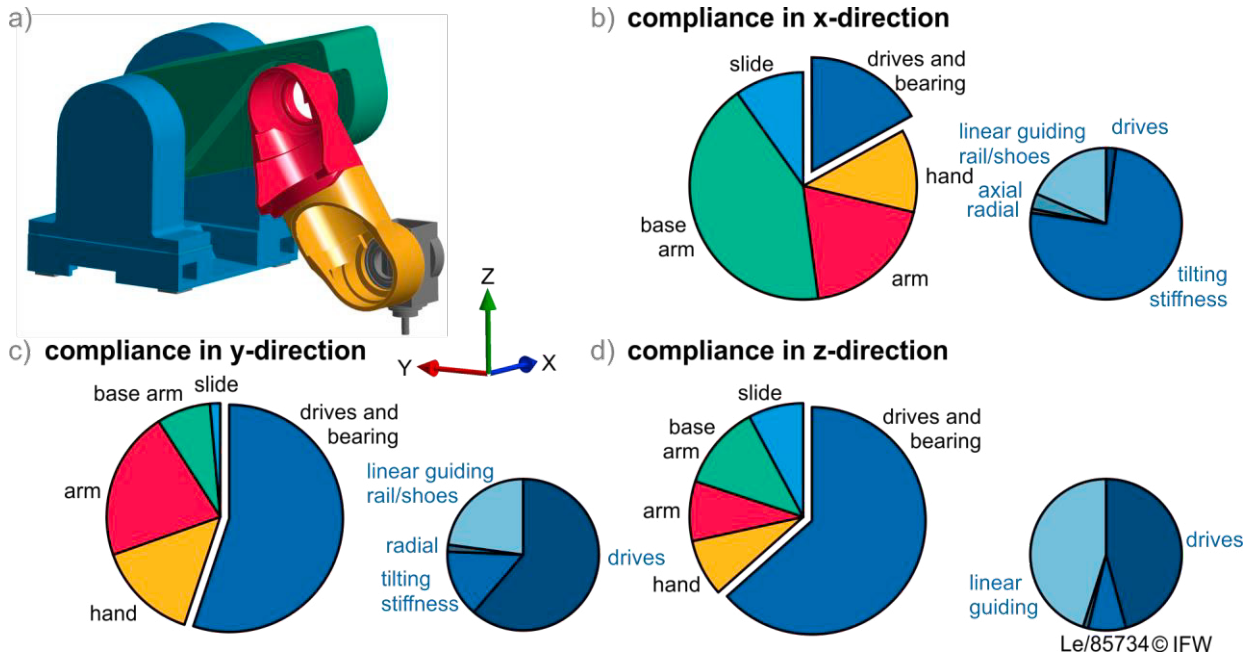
Impact of the machine tool parts on the stiffness at TCP
